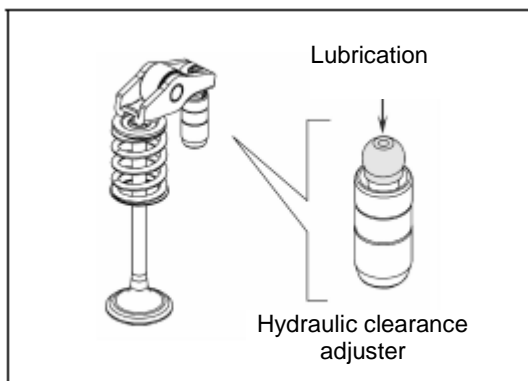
Installing the hydraulic clearance adjuster and rocker arm
